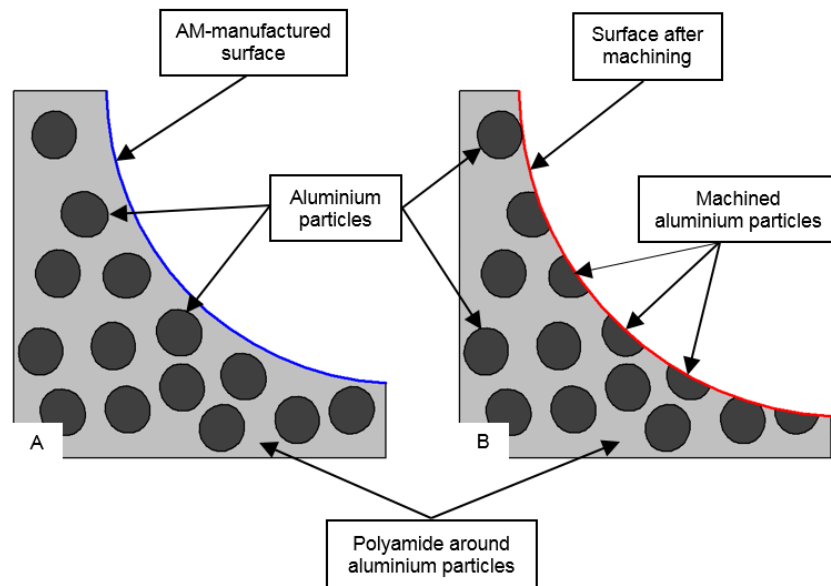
The aluminium particles and polyamide material, as manufactured by AM techniques (A), and after machining operations on the Alumide[®] surface (B).
